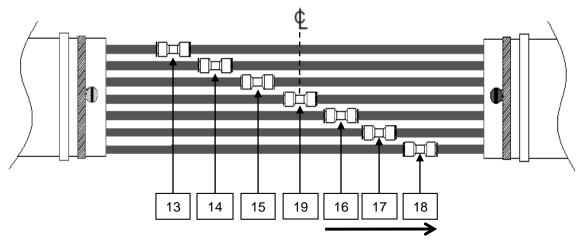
Couple Inner Ring Tubes 16, 17, and 18 to the Right of Tube 19 Coupling
